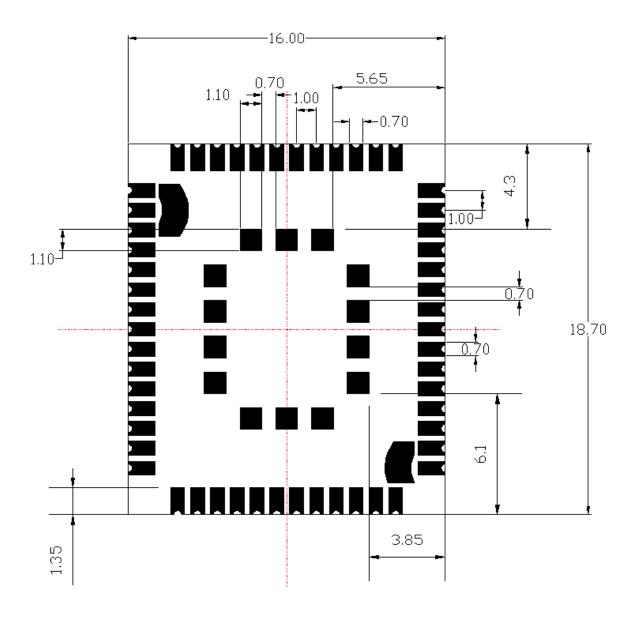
MC60 Bottom Dimensions (Unit: mm)
